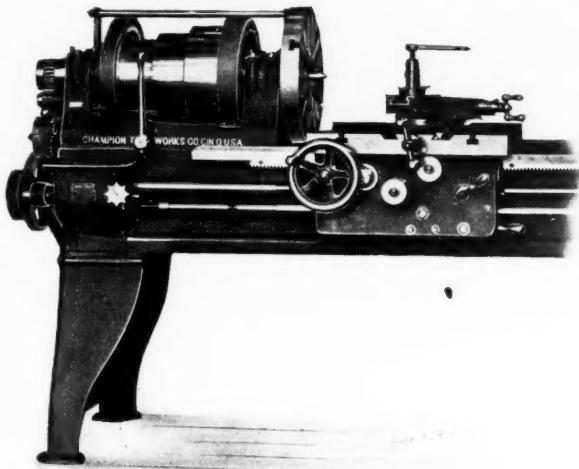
Double Back-geared Head-stock for Champion Lathe
